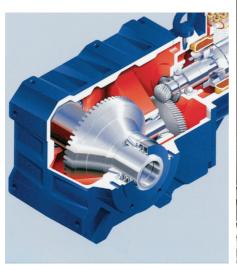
Sectional drawing of a bevel-gear unit with helically toothed gear stage at the input and spiral bevel gear end stage
